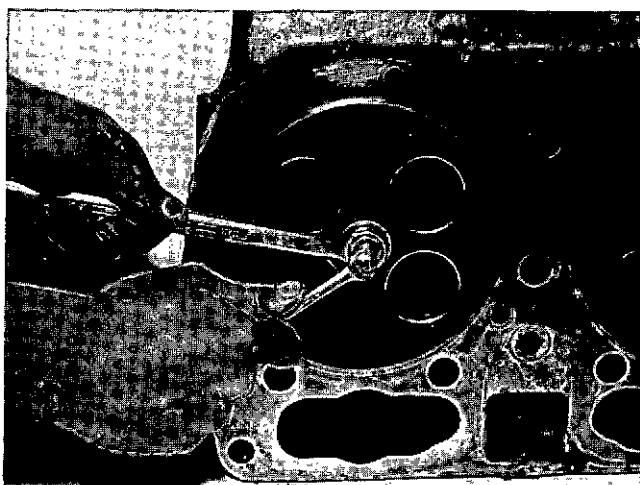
, V40204. Install injector sleeve holding tool ST-384
